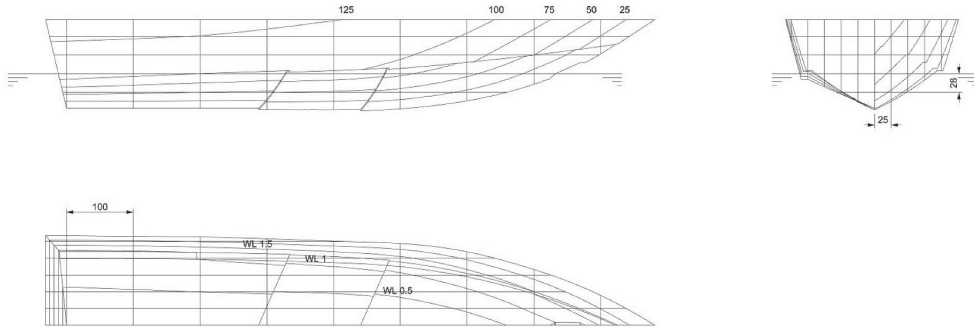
C08 model lines plan: Sheer Plan, body plan, half breadth plan. Transversal section every 0.100 m, buttock line every 0.025 m, water lines every 0.028 m.
